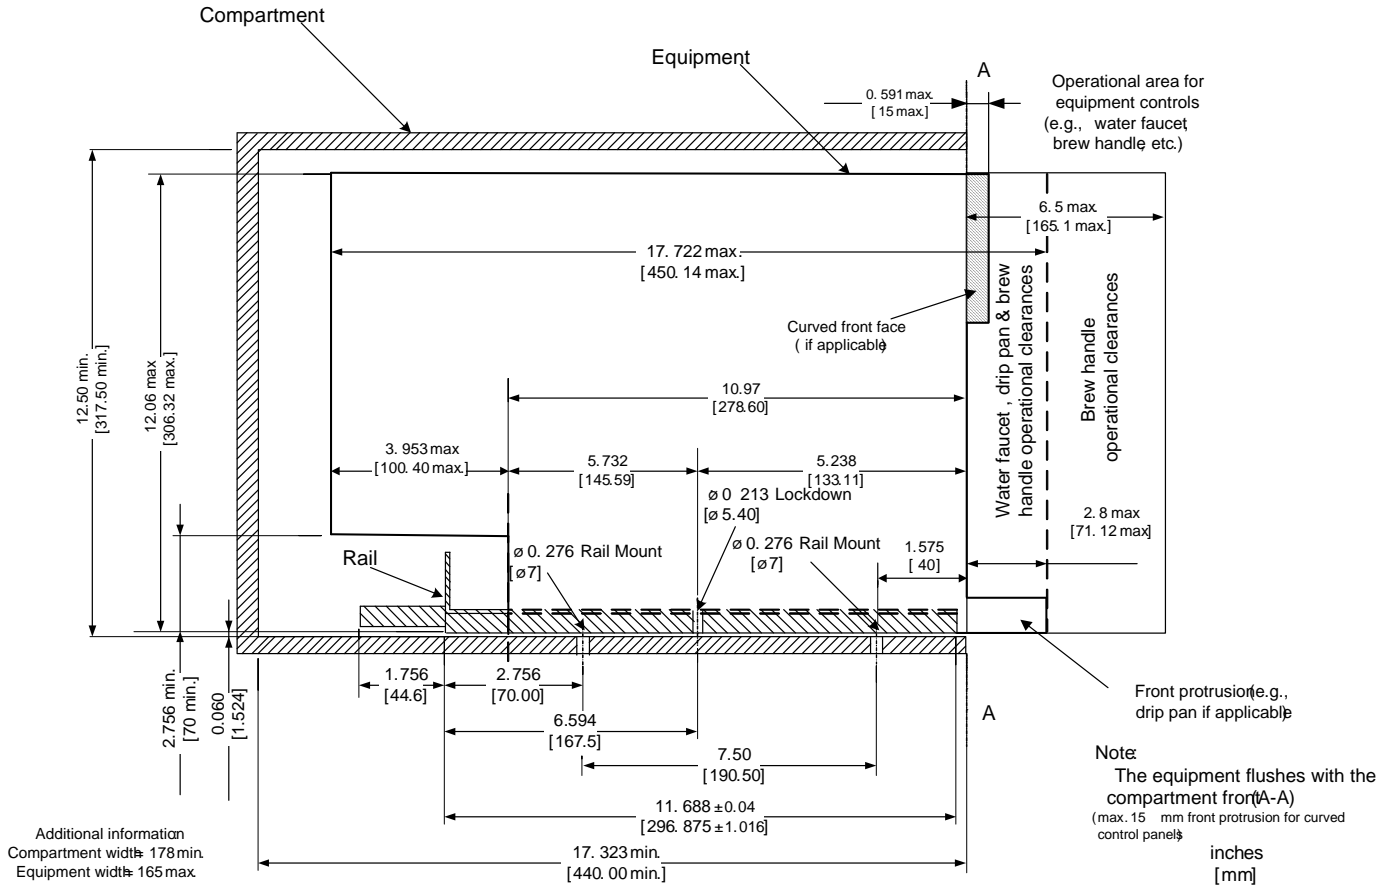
E – GAIN Size 1 Consolidated Assembly View
